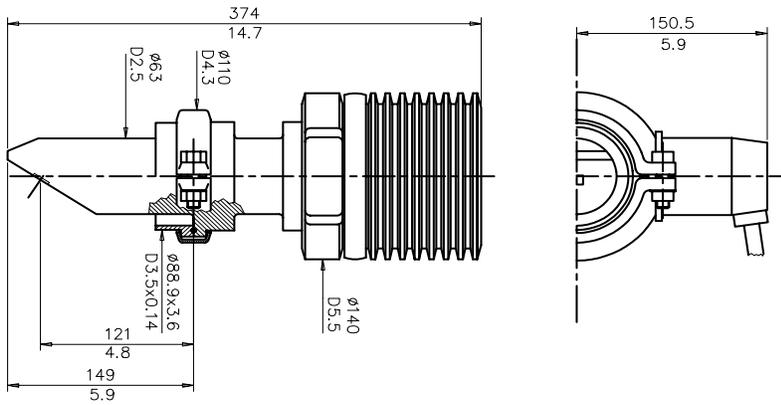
Dimensions: Sensor with Sandvik clamp (mm/in).
